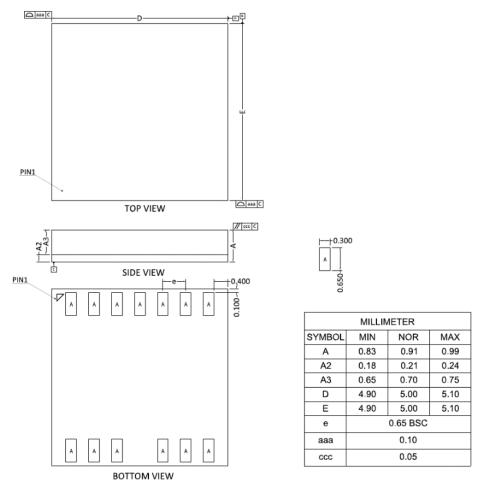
LGA13 5-mm x 5-mm Package Shape and Dimension
